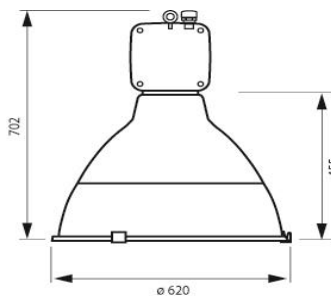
GALAXY SHOW SEMIREFRACTOR
